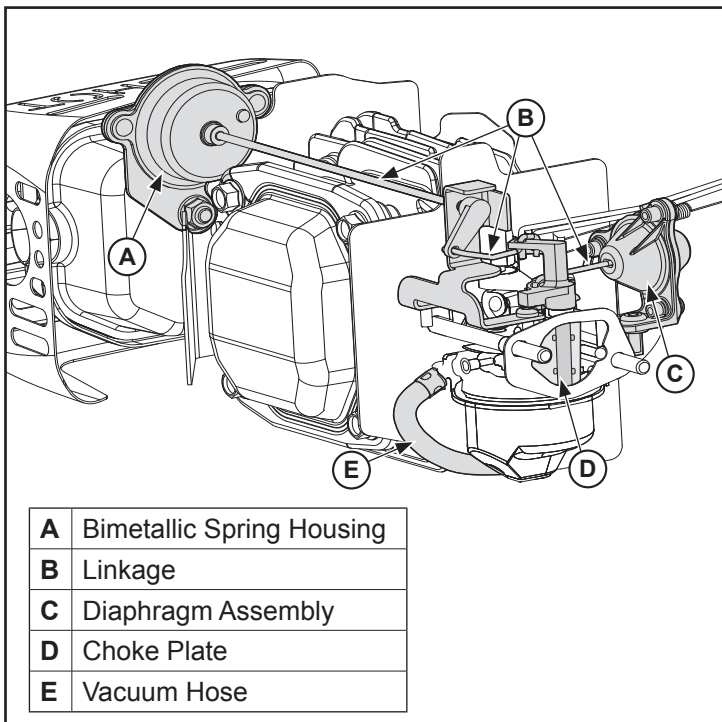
Auto Choke (Air Cleaner Base and Engine Cover Removed for Clarity).
